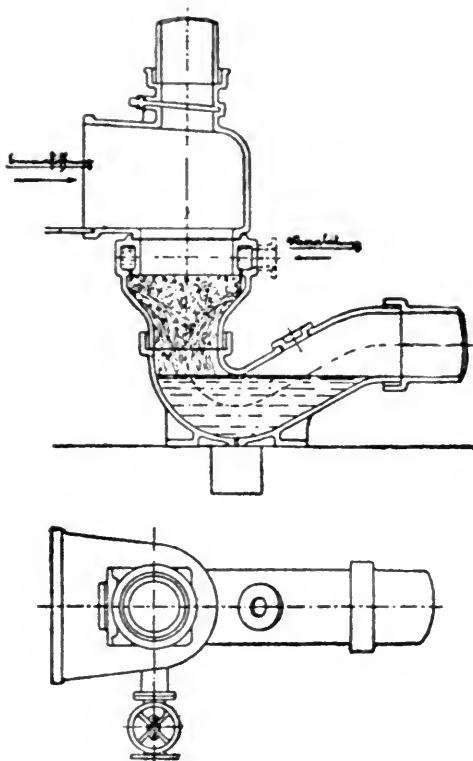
Selwig & Lange Guncotton Conveyor.
